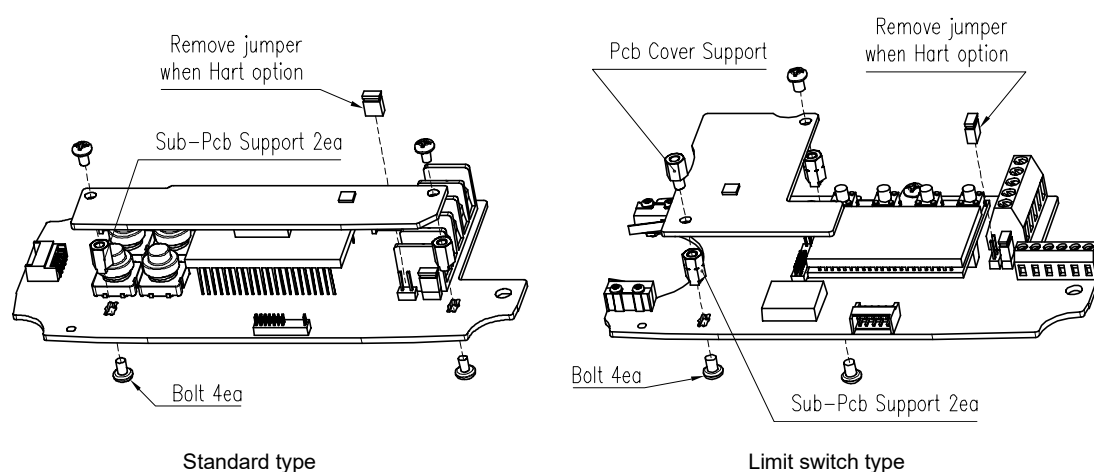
Installation of Optional sub-PCB on Main PCBs
